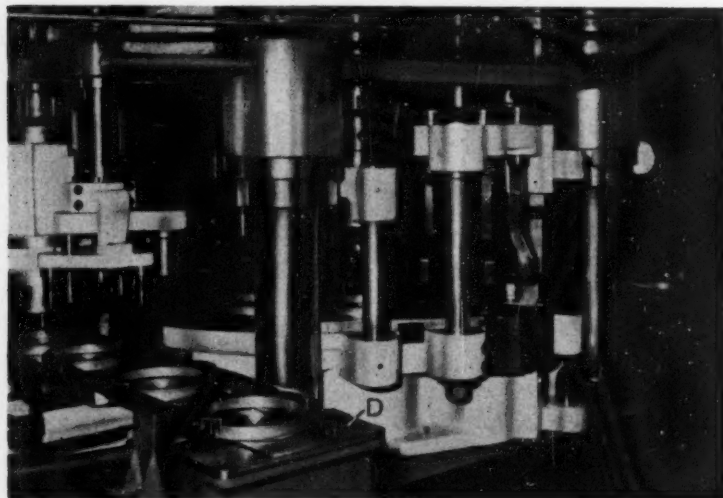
View of the In-line Transfer Mechanism for Feeding Partially-completed Workpieces to One of the Side Stations on a C.M.B.G. Transfer Press
